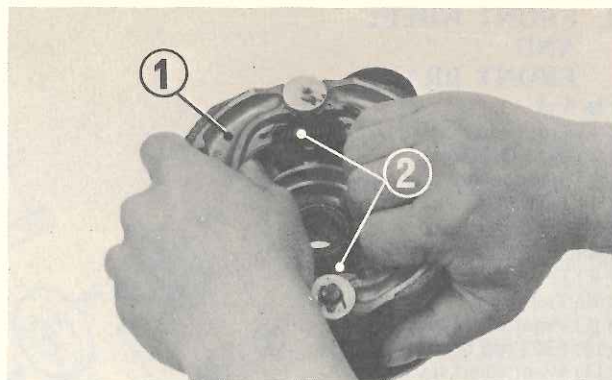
(1) Brake shoes (2) Brake shoe springs
